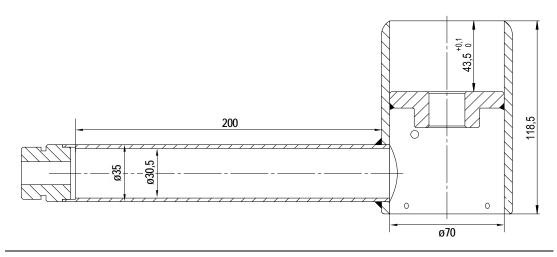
Dimensioned drawing rod sensor Type NOS-V40
